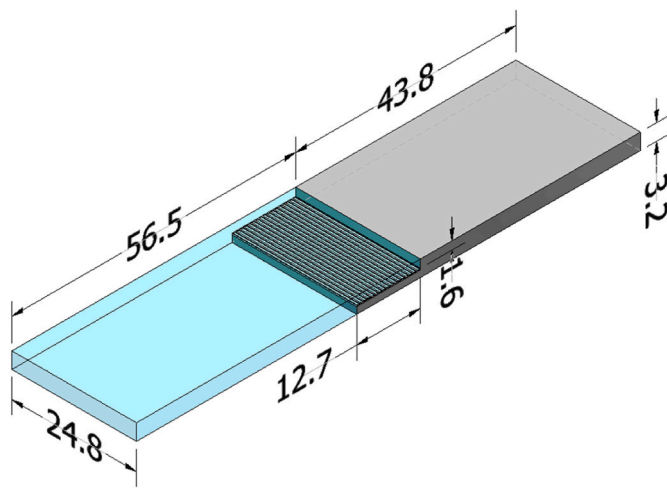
Geometry and dimensions (in mm) of the injection overmolded PC/AA6061 hybrid joint specimen. AA6061 in light gray.
